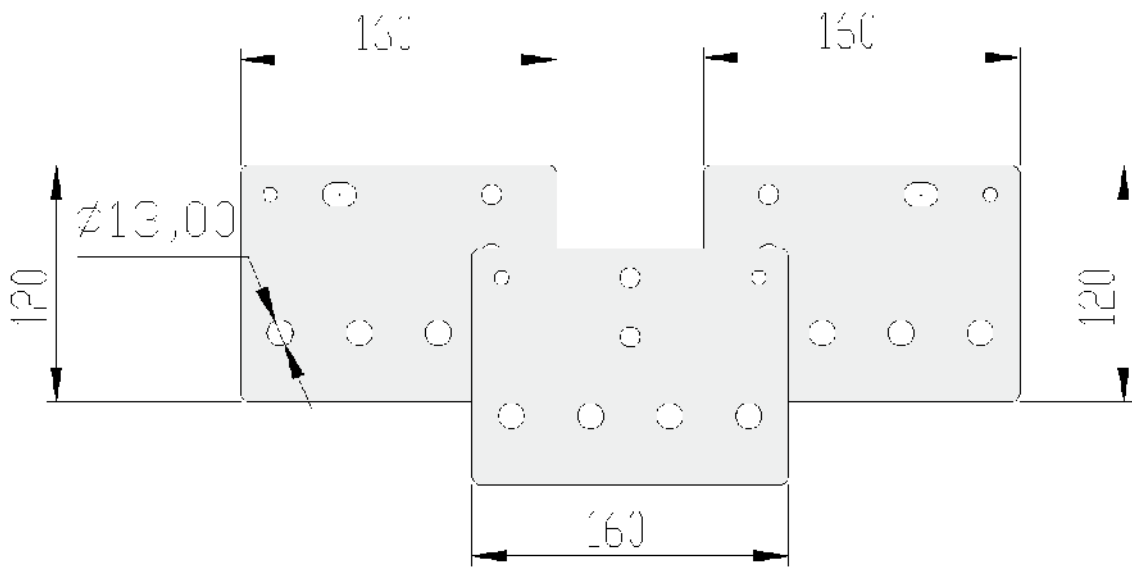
PWS1-500K series AC wiring copper bars dimension
